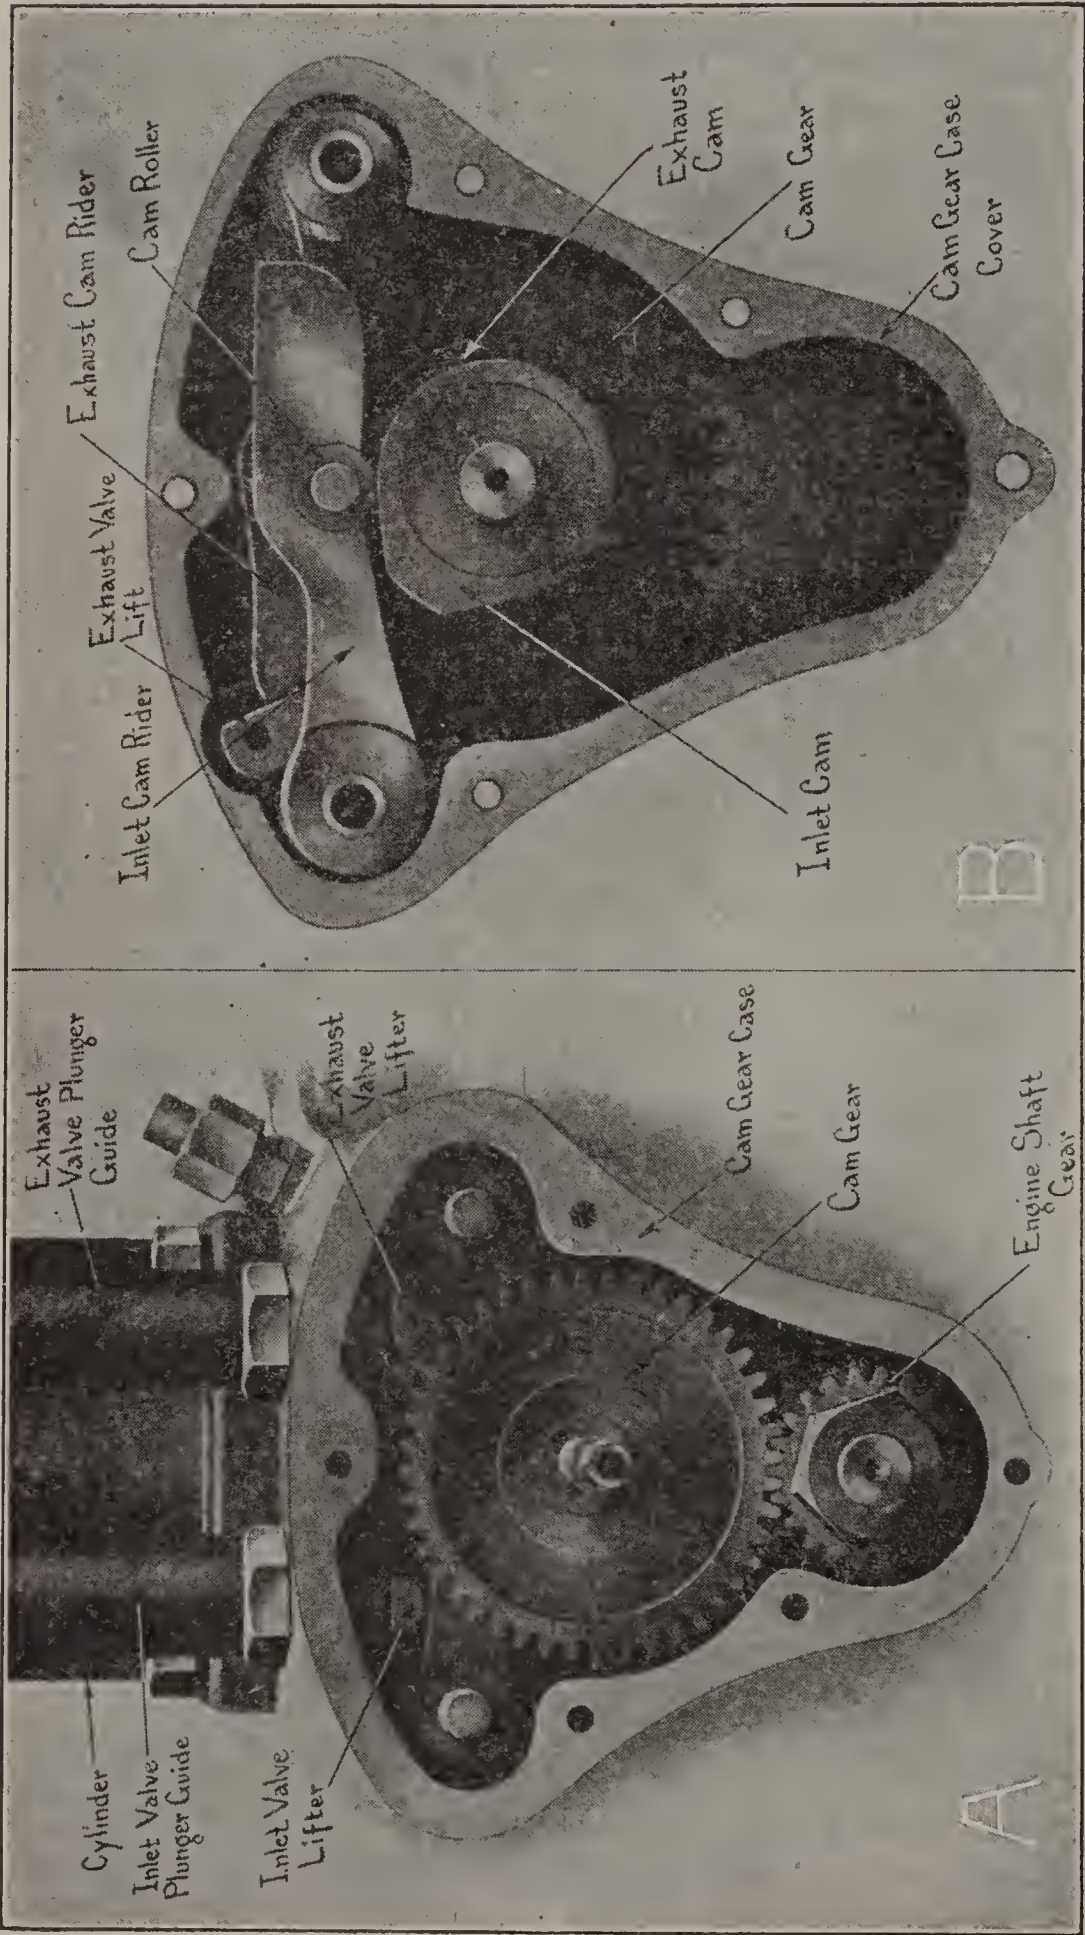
Arrangement of Valve Operating Gear of Single Cylinder L Head Precision Motors. A—Timing Gear Case With Cover Removed, Showing Method of Driving Cam Gear From Crank Shaft. B—Outlining Cam Gear With Inlet and Exhaust Cams Integral and Design of Valve Raising Levers.
